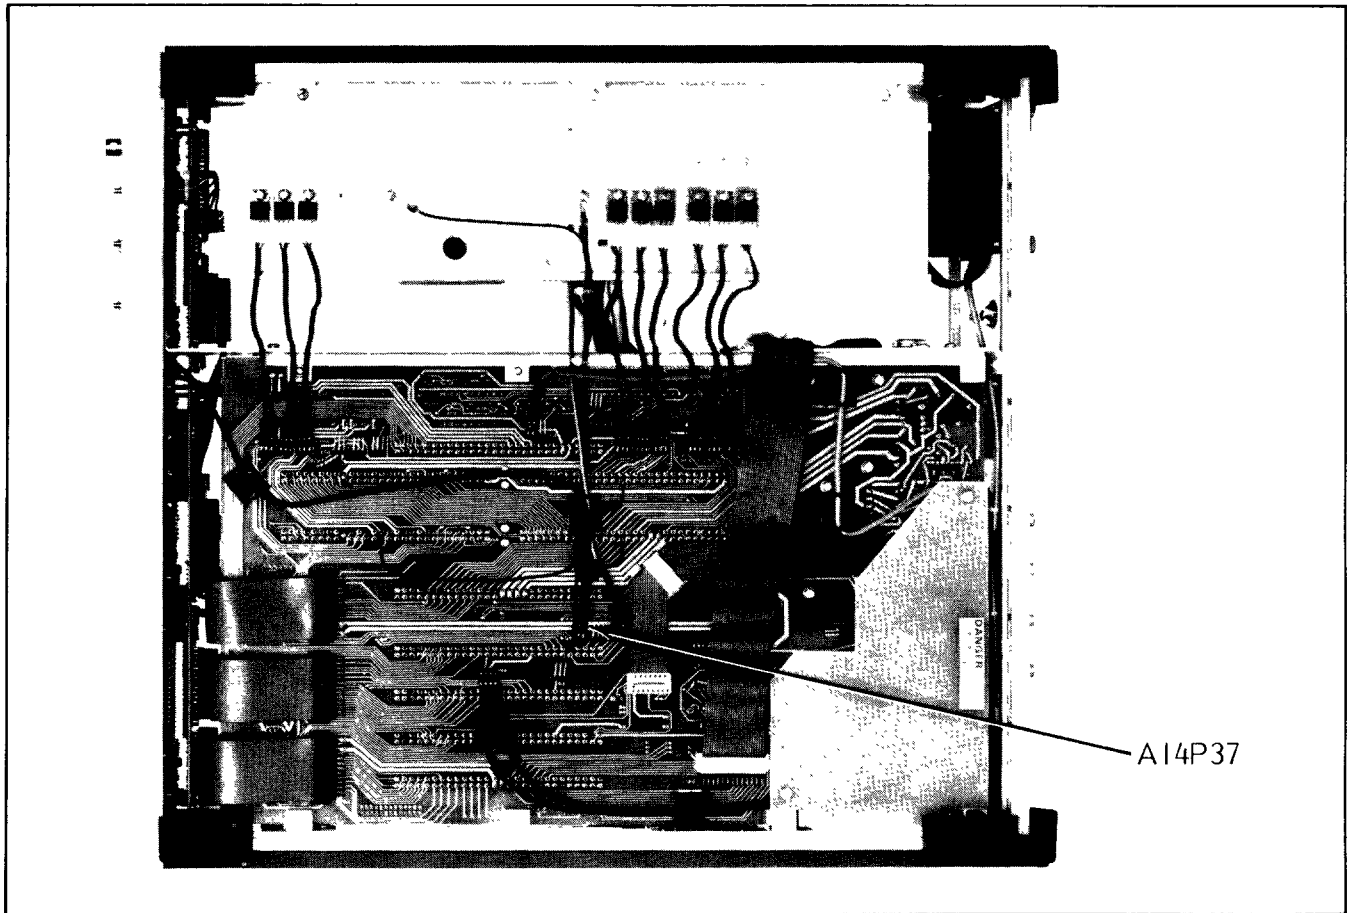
6600 Series Programmable Sweep Generator, Bottom View
